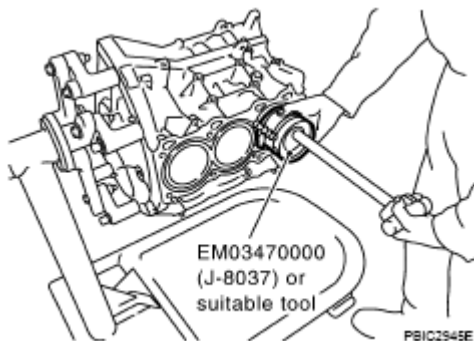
Installing Piston And Connecting Rod Assembly To Crankshaft
